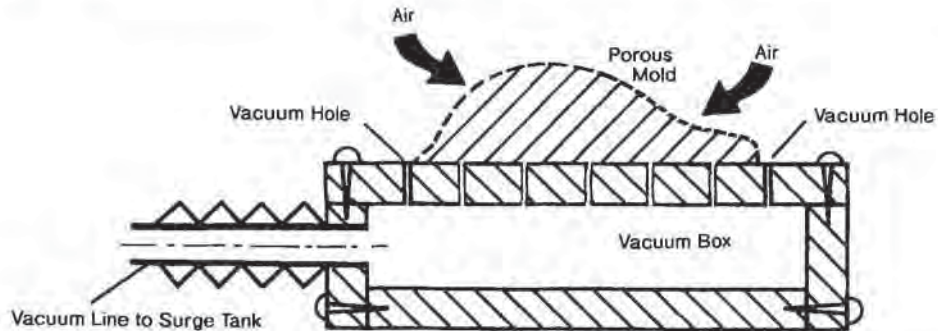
Schematic of mold, vacuum holes, vacuum box and corrugated line to surge tank. Mold material here is porous fiberboard through which air will pass
